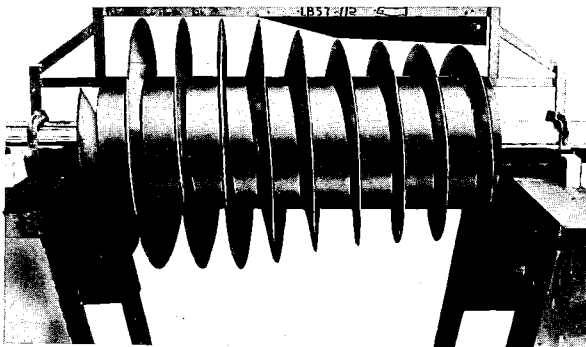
Employing gauge to check tip clearance of conveyor blades
